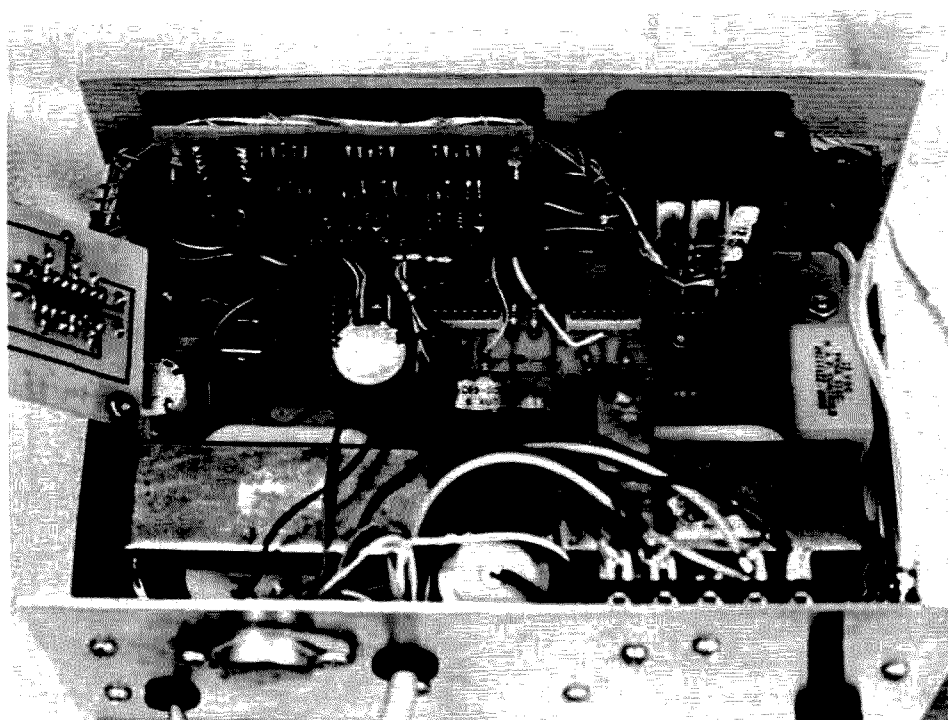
Photo C. The double-decked board has been rotated away to show layout of the main board. The displays and drivers are mounted on the board at upper left. Thumbwheel switches are at upper right. The A/D converter is the large chip at left center. Motor control and brake relays are at right center. The tops of the transformers can be seen near the bottom. At the left is a separate two-conductor shielded cable for the sensor circuit. At left center is the main rotator cable. These have been replaced by a nine-conductor molex connector.
